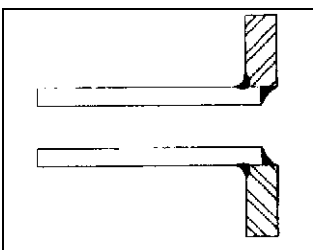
Pipe recessed, flange and pipe, same alloy — good
